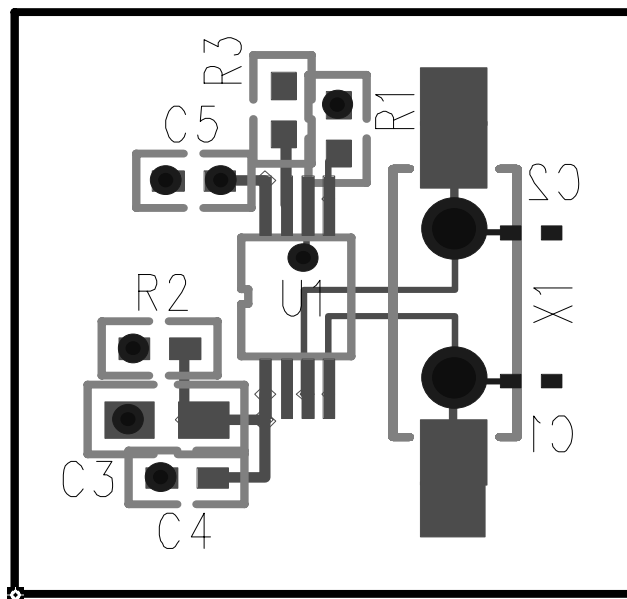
B. ICS840001I PC BOARD LAYOUT EXAMPLE
